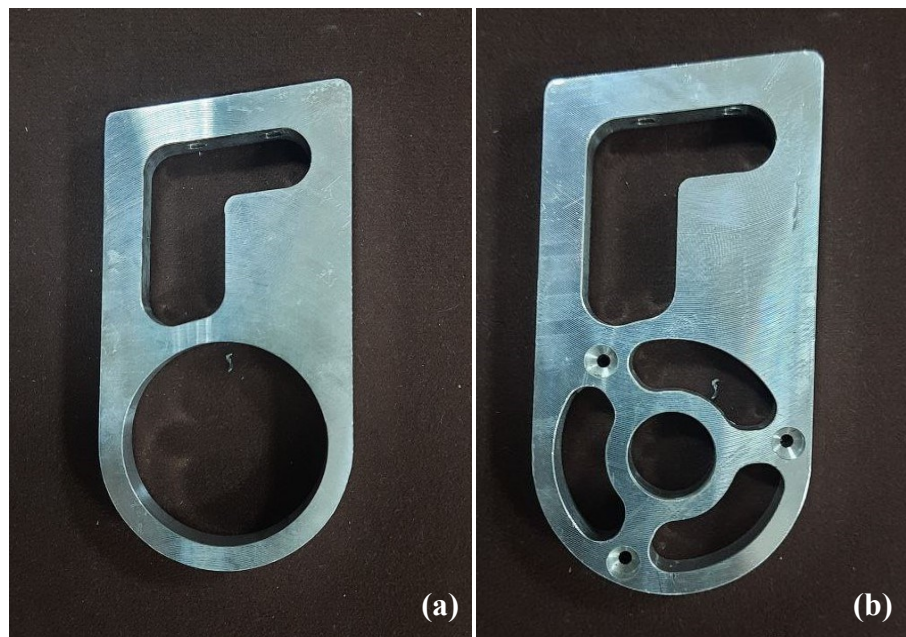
Manufactured shaft holders (a) left shaft holder and (b) right shaft holder
